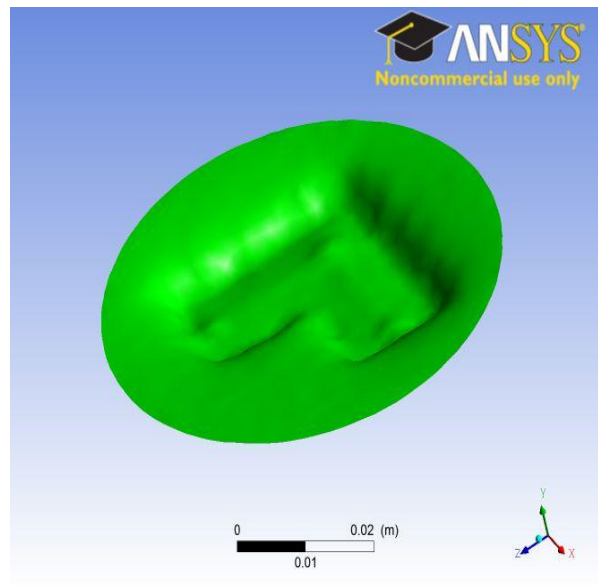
Workpiece top surface after 60 s machining of Model 3 with an inlet velocity 43 m/s.
